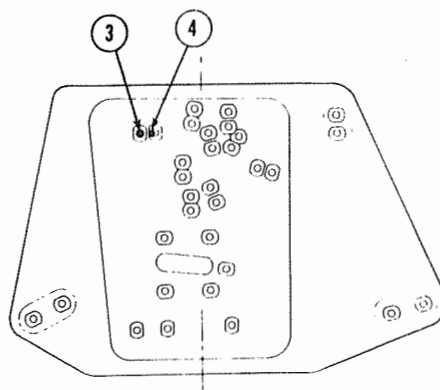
(Sheet 1 of 7 Sheets). Mechanical Safety Latch Control System — Key Drawing
